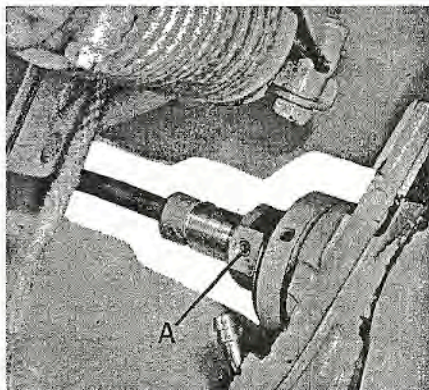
On some models speed control holding friction can be adjusted by loosening set screw (A) and tightening or loosening friction nut.
